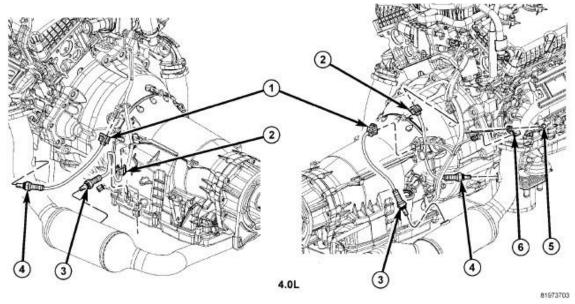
CKP Sensor & Oxygen Sensors Courtesy of CHRYSLER LLC
